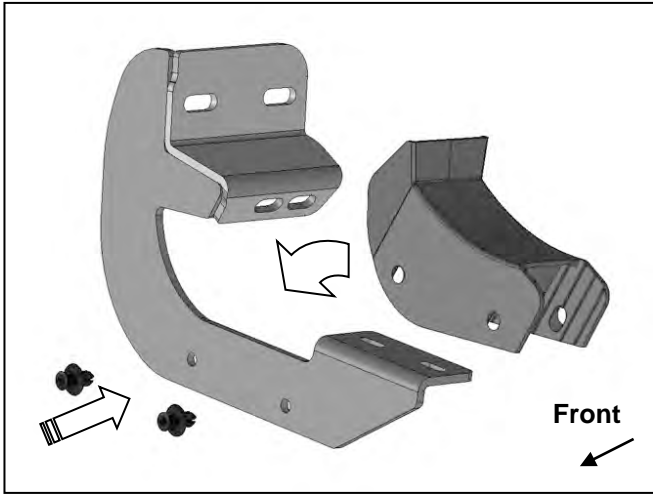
Attach Bracket to back of pinch weld (models with factory holes in pinch weld only)
